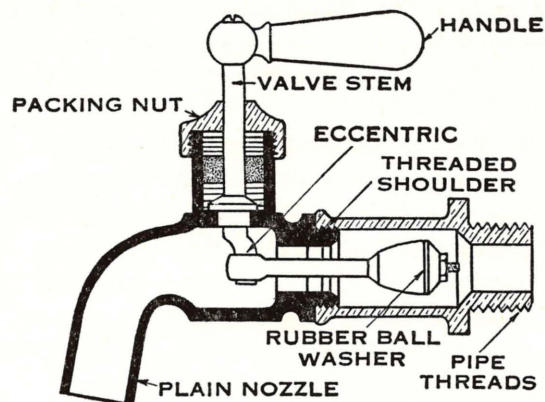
The section view of a Fuller faucet showing the working parts. Valve open
